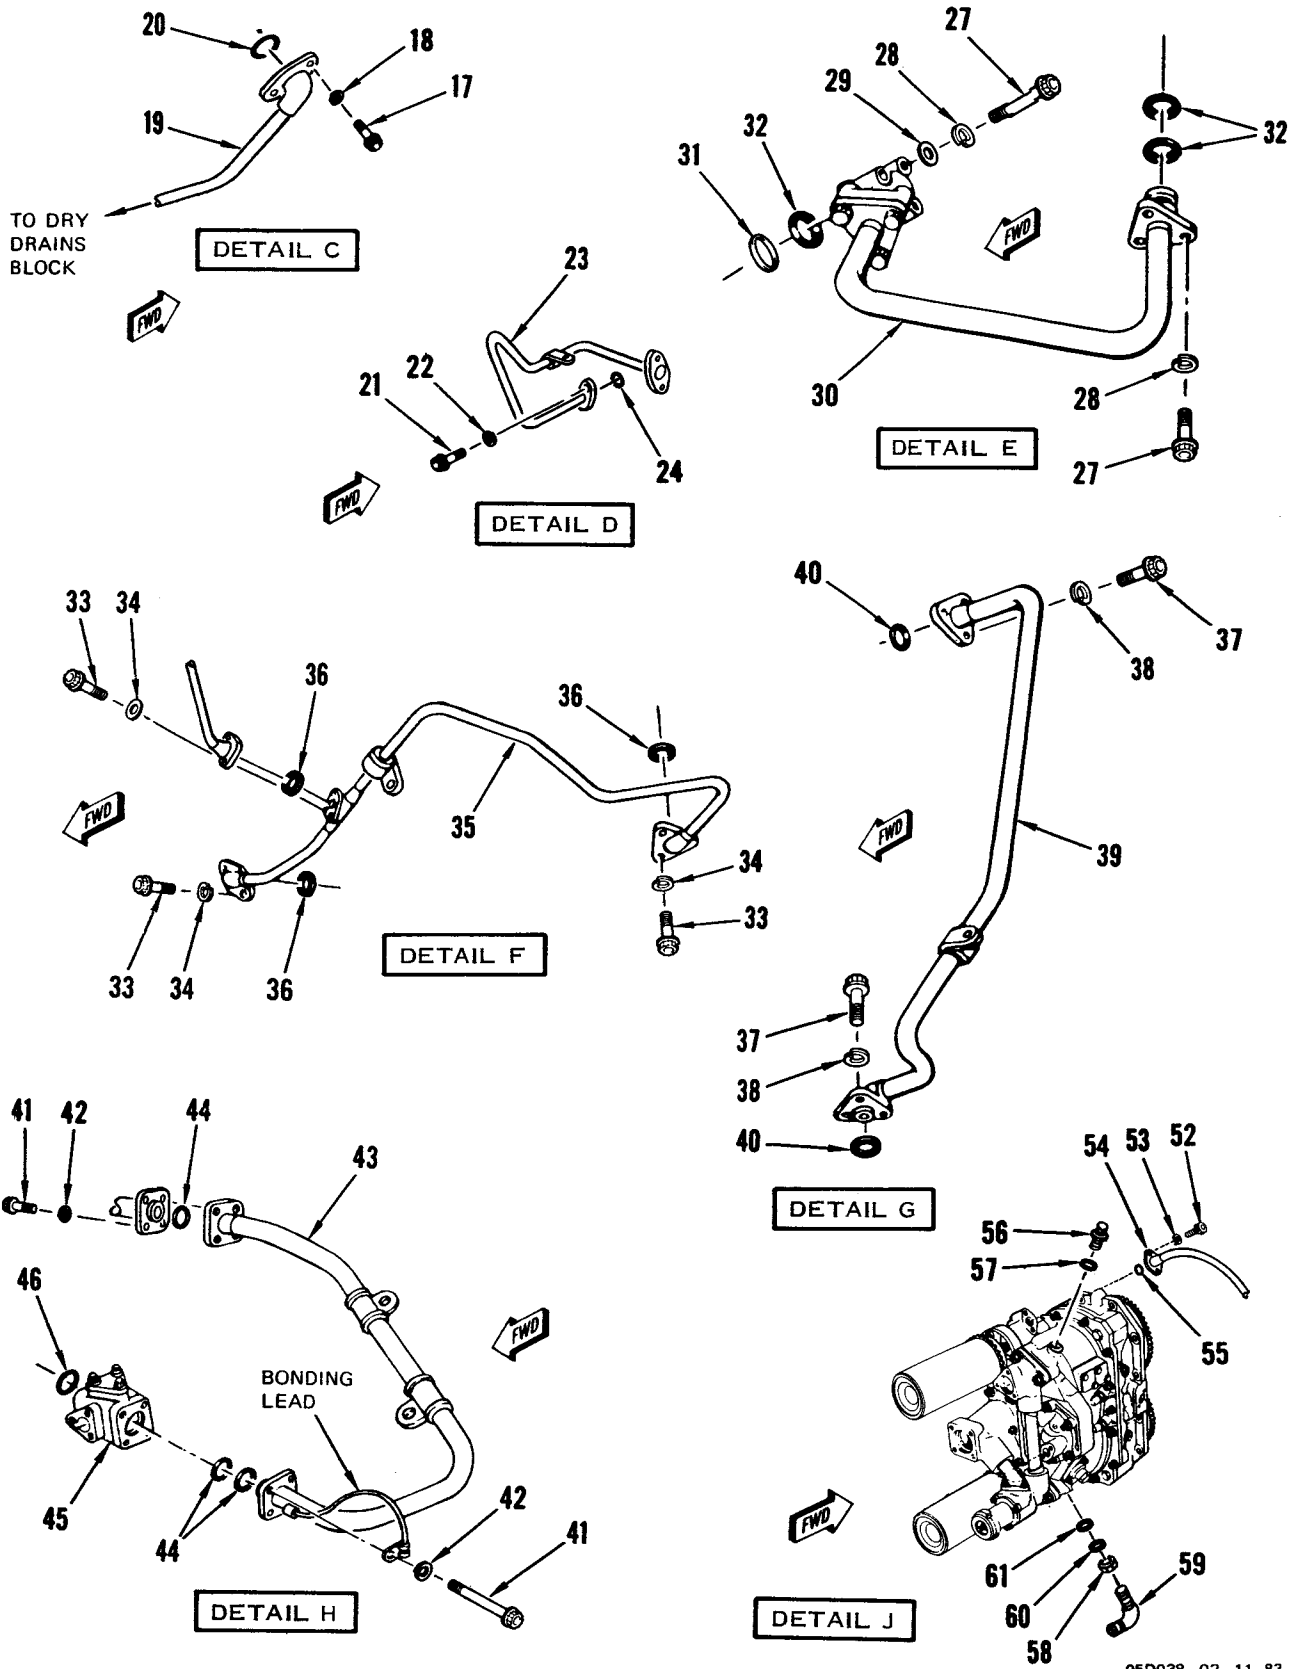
Removal and Installation; HP Fuel Pump (Sheet 2)
